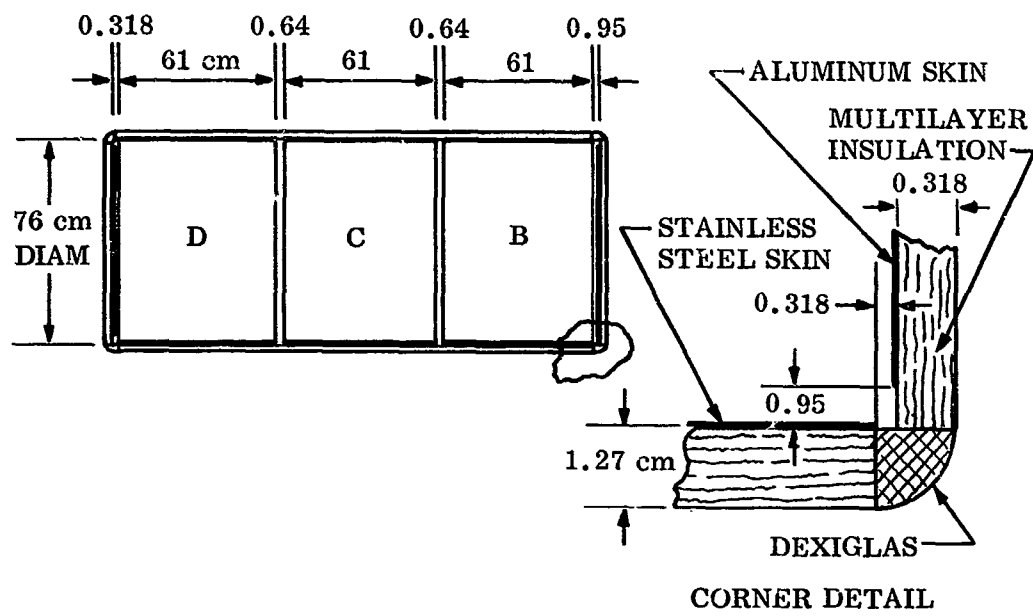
Configuration 1: One-Dimensional Test Arrangement
